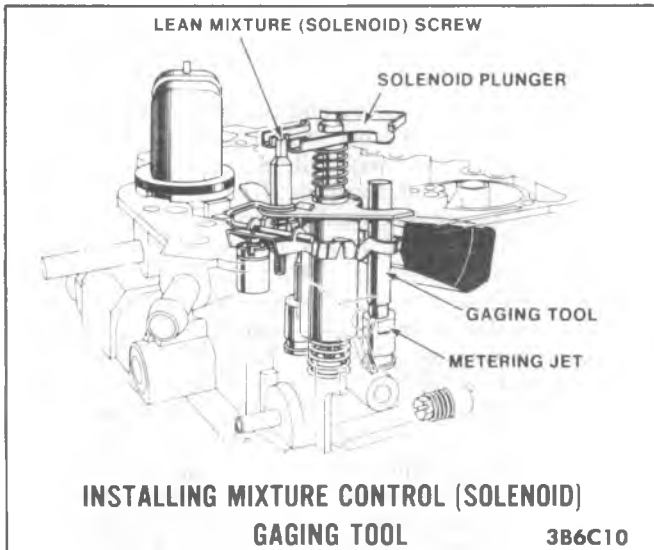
C1-10 Installing Mixture Control Solenoid Gaging Tool
